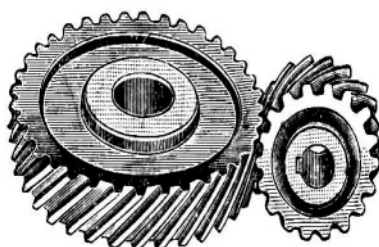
Leonardo da Vinci worked on the gears improvement; he invented helical gears, Milonov Ju.K. (1936)
